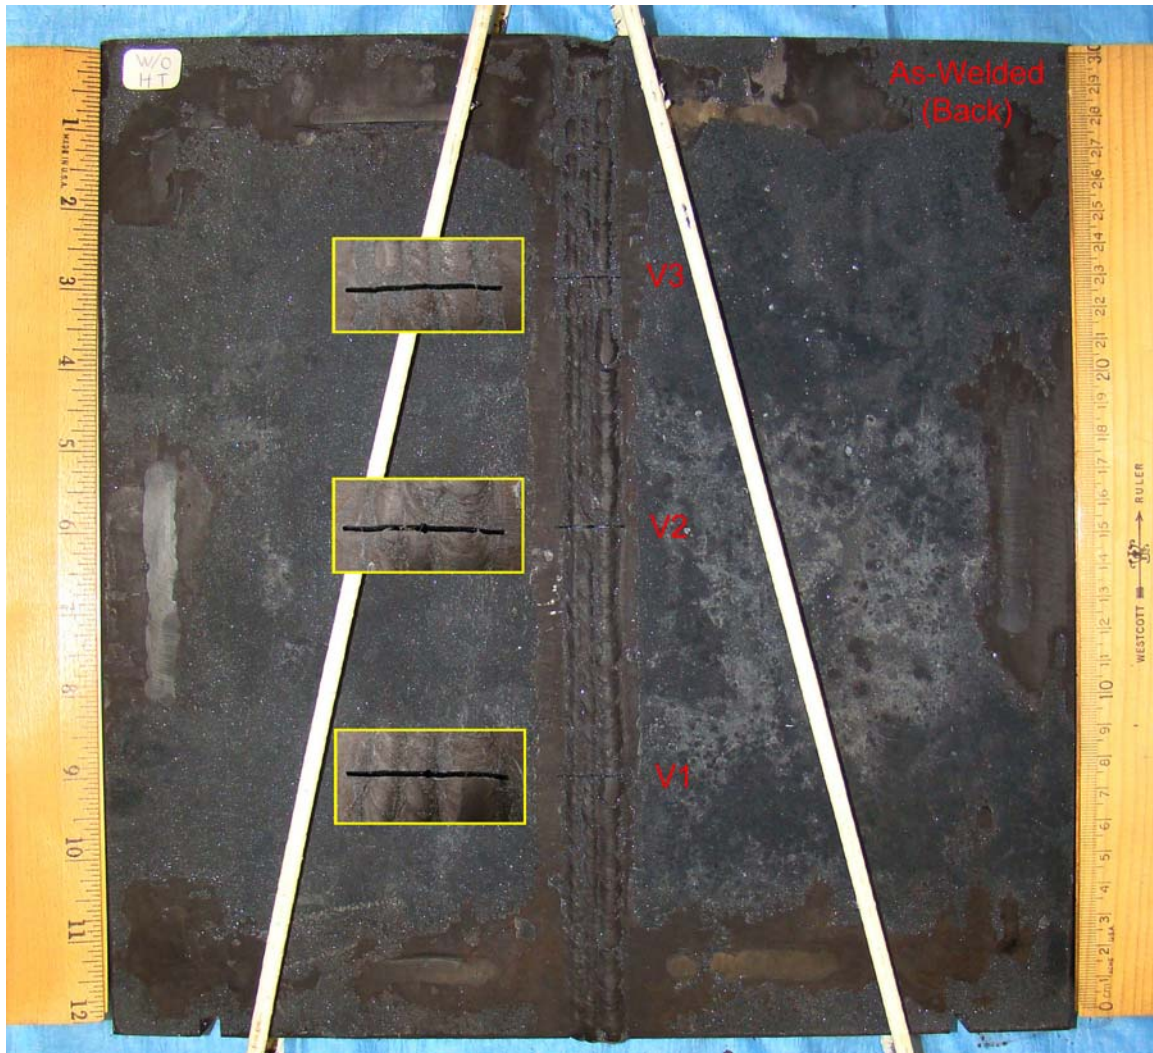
As-welded plate after exposure to test solution for 12 weeks (Back side, insets show close-up of the machined cracks).
